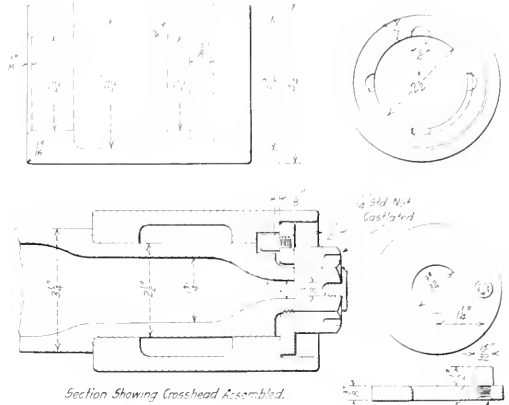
A—Extension Shoe for Piston Rod Shown in Fig. 9
